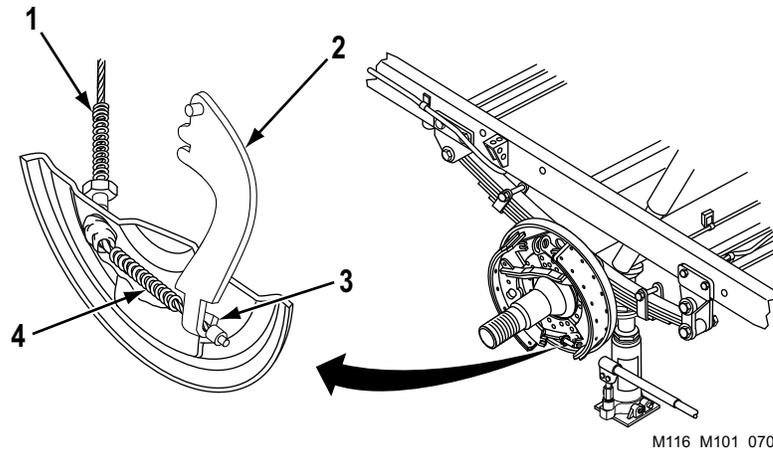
Brake Cable Assembly Removal From Wheel Brake Lever.
